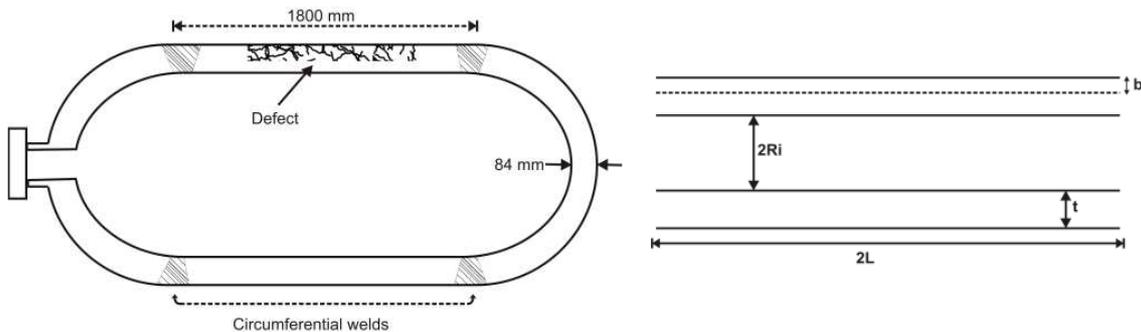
Left: Modified CEBG Test 1 pressure vessel with assumed defect. Right: fracture mechanic crack model used to describe the assumed long external axial surface crack.
